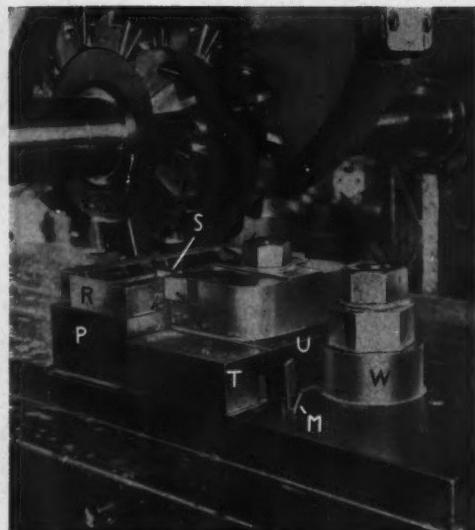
This fixture holds two clincher ram blanks for the third milling stage, and is mounted on the table of a Fritz Werner machine arranged for single-end milling. A machined workpiece can be seen at M
